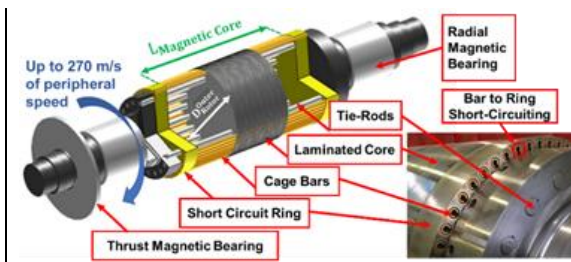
High-speed laminated squirrel cage rotor technology with active magnetic bearings.
